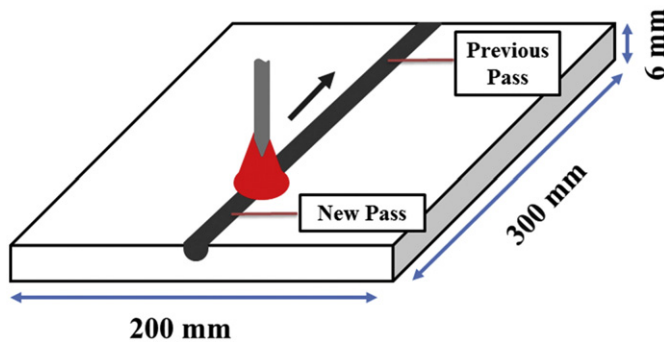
A schematic drawing of the plate and autogeneous TIG welding. The same material volume was melted, and remelted, with one, two, three or four bead-on-plate weld passes.
